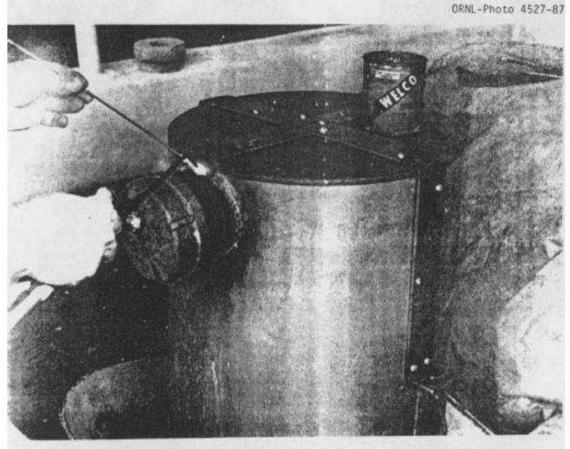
The support frame can be brazed or bolted to the side of the gasifier unit. All bolts should be sealed air tight.
